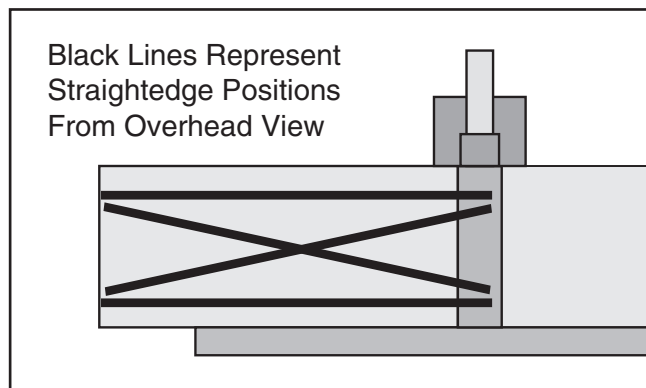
Straightedge positions for verifying if outfeed table is parallel with cutterhead.
